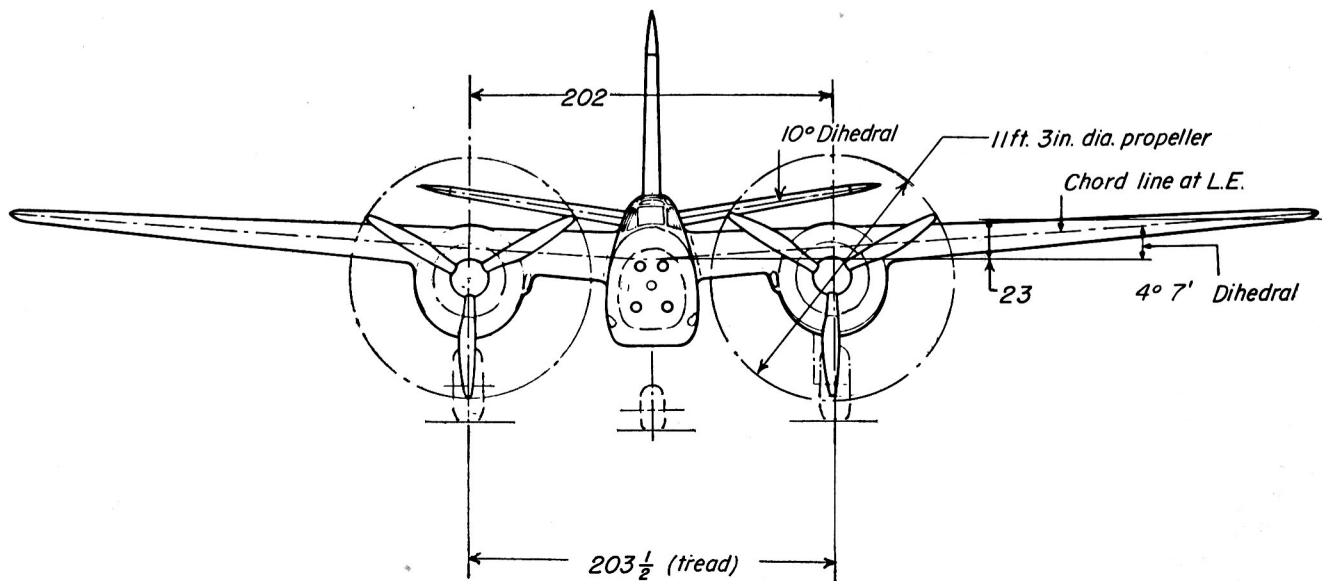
Front view of the A-20 showing wing and tail dihedral, propeller disk diameter and location, and landing gear tread.
